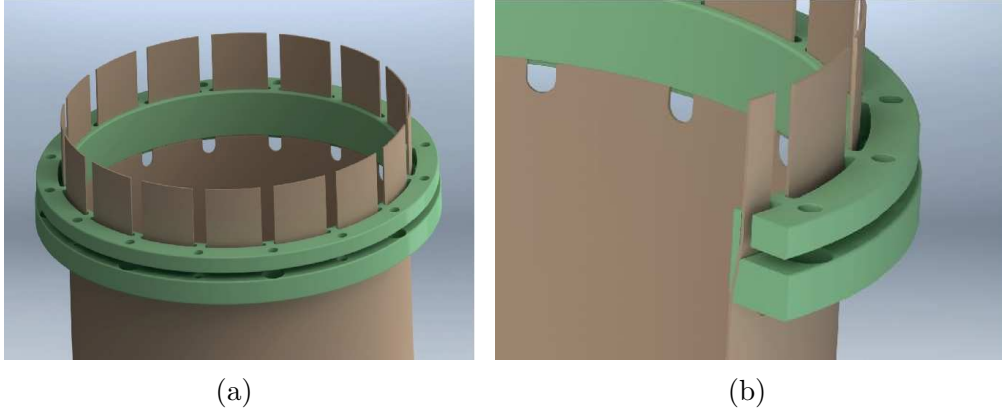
(a) Schematic view of the support ring used to fix the inner field-cage flaps to the flange. (b) Details of how the flaps are inserted in the slotted holes of the support ring.
